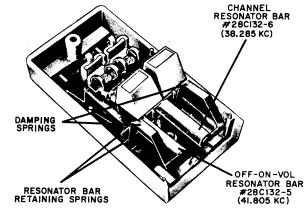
Top View of Son-r Tuner \$121C Showing Location of Resonator Bars.
